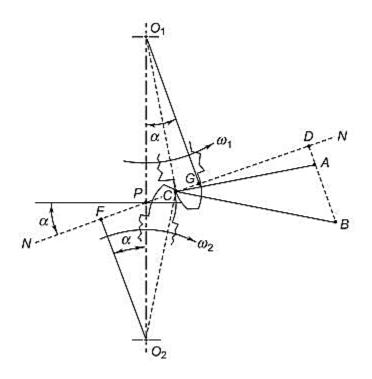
, Law of Gearing (V B Bhandari, 2006, p. 649)
